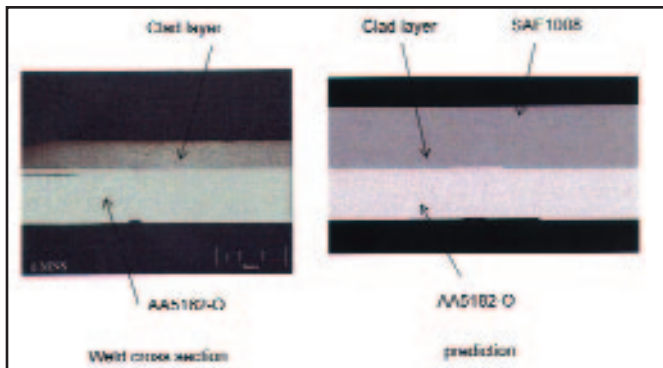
Weld structure at four cycles weld time: no melting observed. The steel sheet separated from the transition clad layer due to short weld time.
